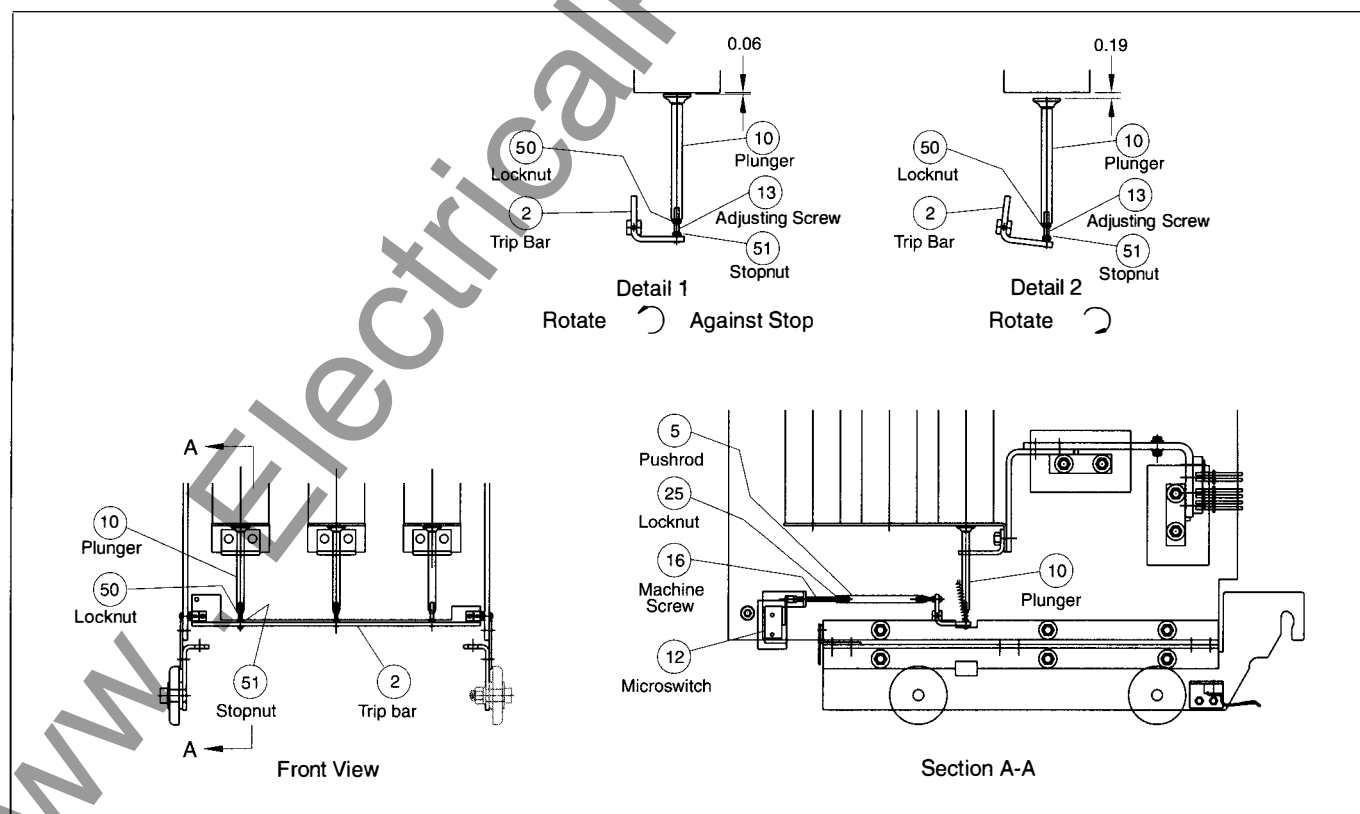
Adjustment of Blown Fuse Trip Mechanism
